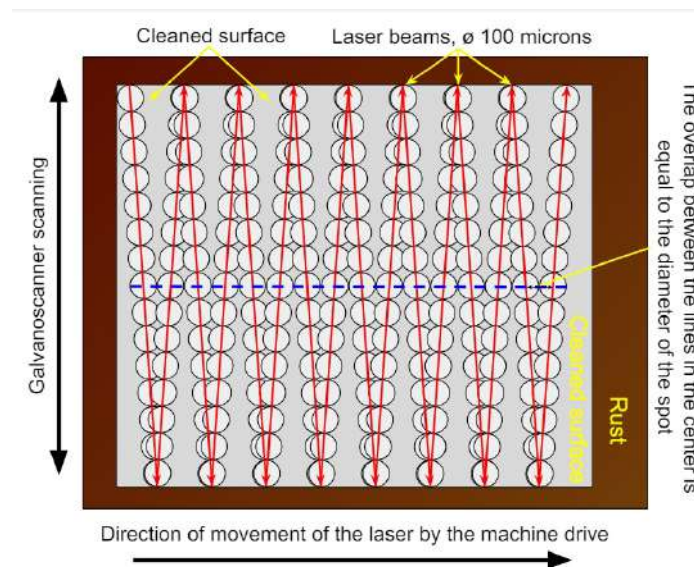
Scheme of forming a processing strip with a single pass of laser cleaning
